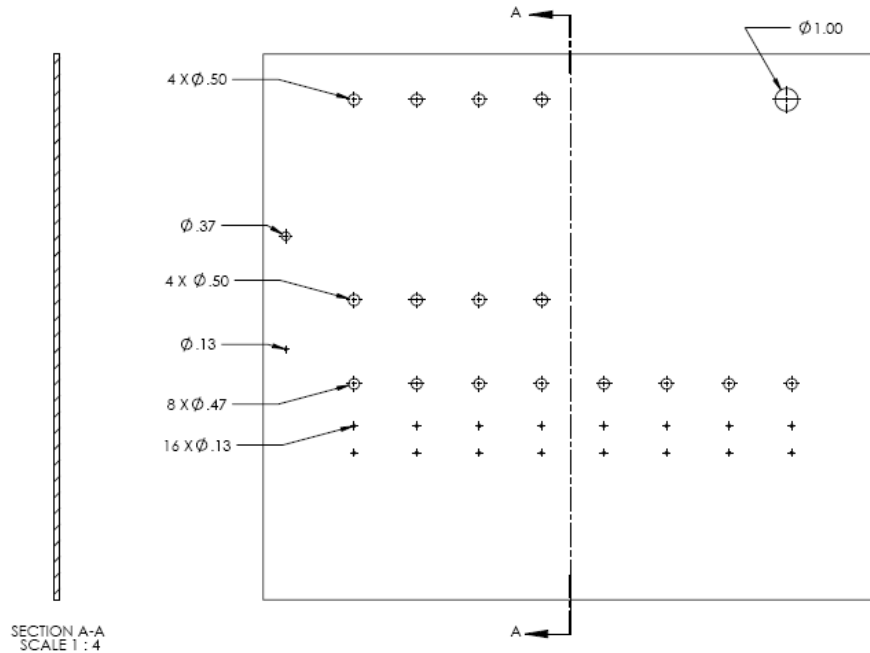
Diameter dimensions of the holes in Plexiglas backboard
